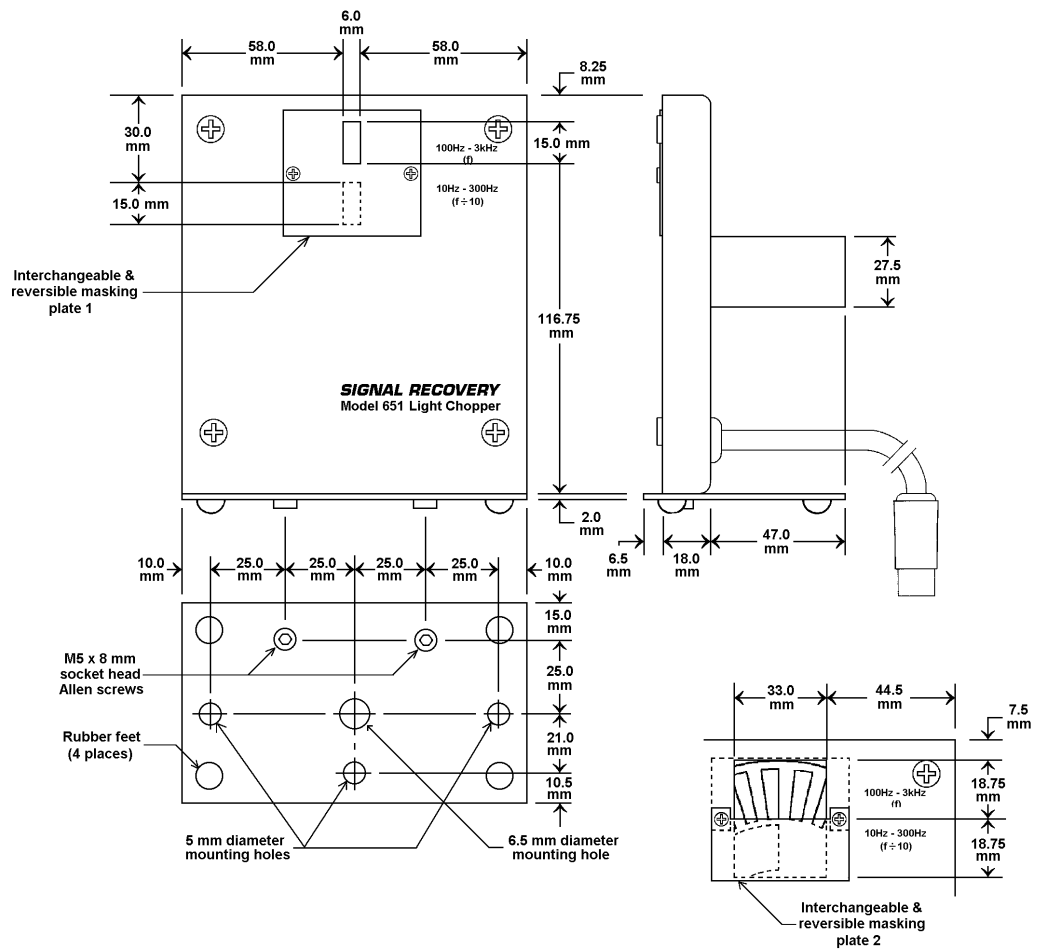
, Model 651-1 Chopper Head Mechanical Dimensions
